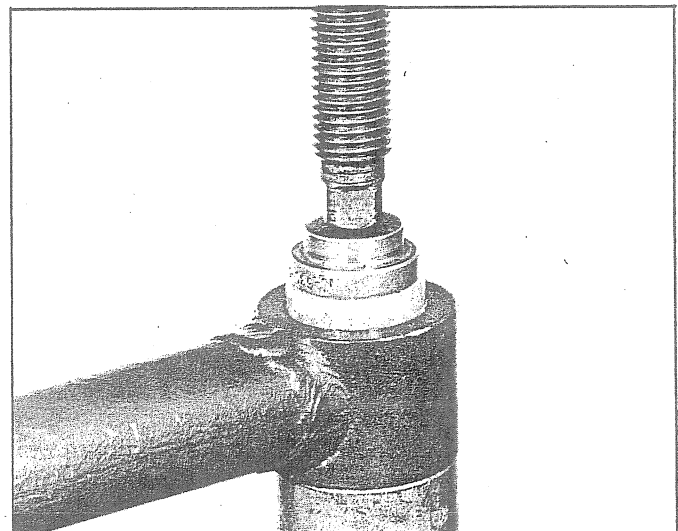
Installing New Ball Stud and Bushing into Housing
